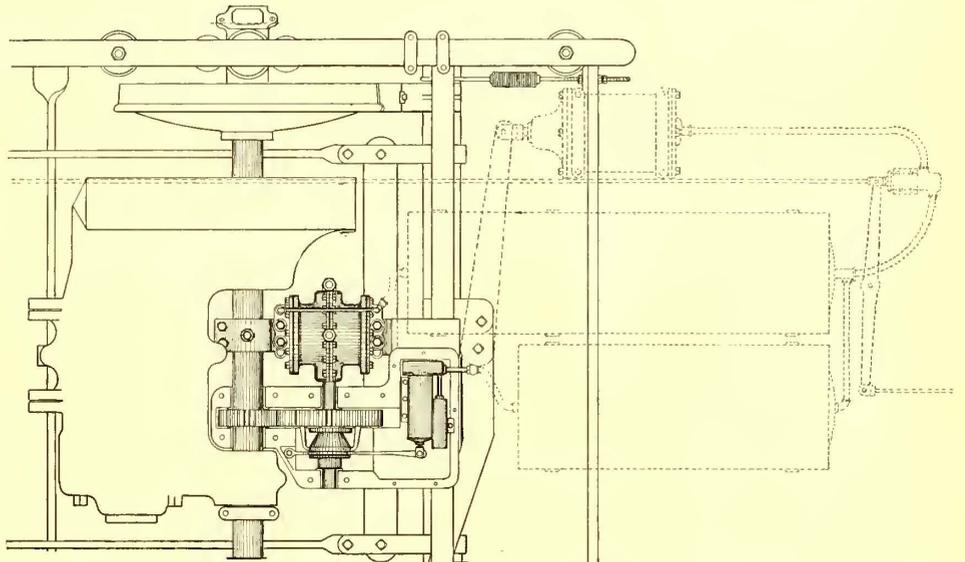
AIR BRAKE EQUIPMENT FOR SINGLE TRUCK CAR.
